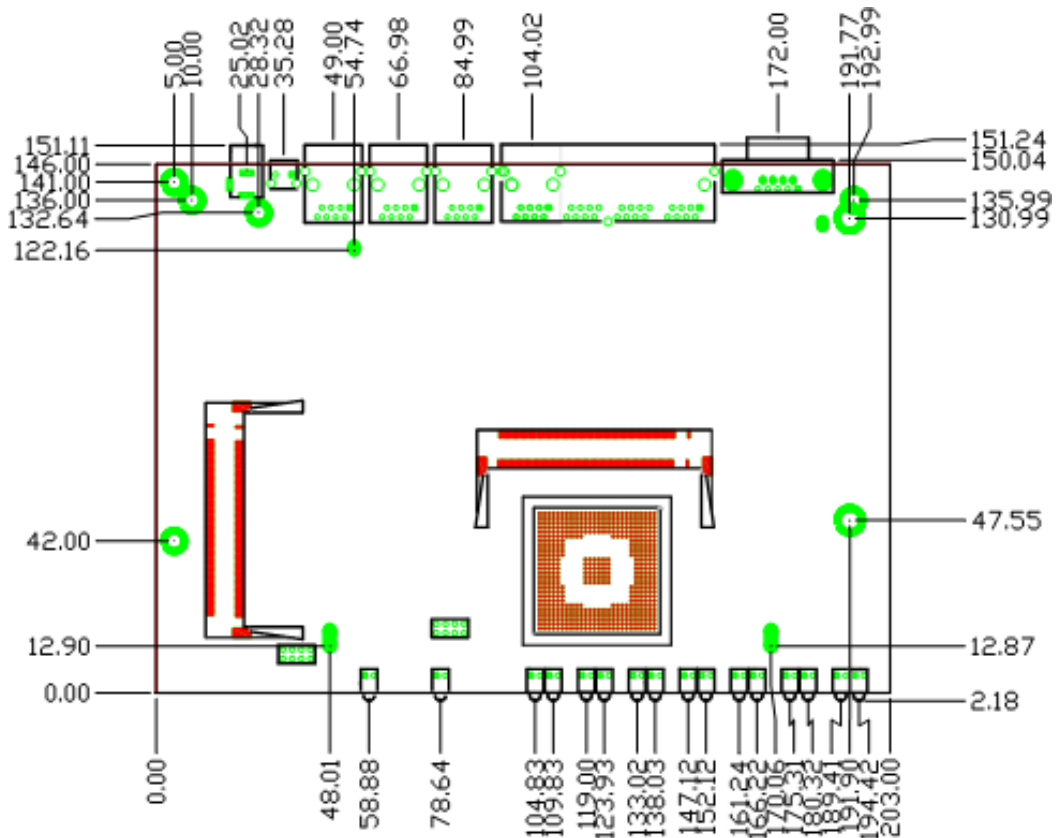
EM-434 Control Board Dimensions (units in mm)
